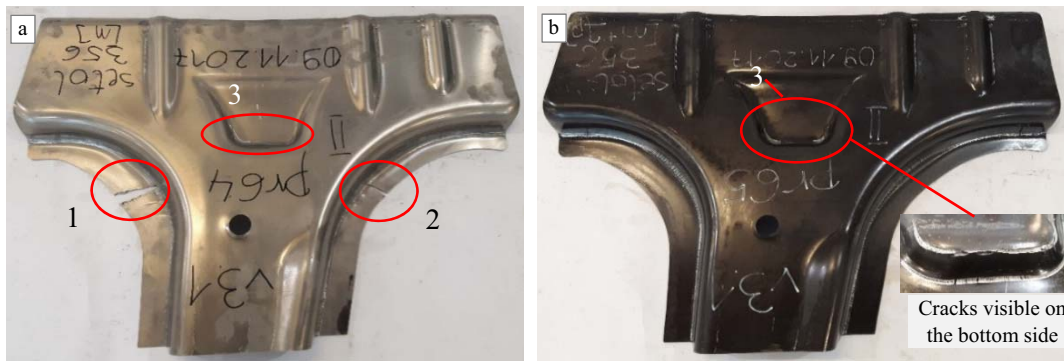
Forming tests conducted with the use of Setol 356 oil, test parameters according to Fig. 3; a) lubrication of the tools only, b) lubrication of the tools and the blank
